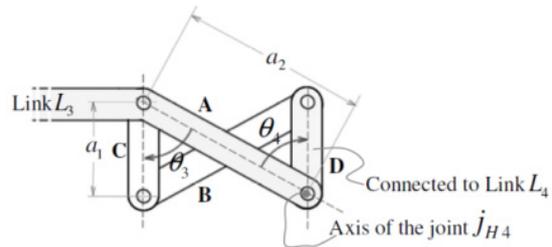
Coupling mechanism for DIP and PIP joints (Taken from [15])
